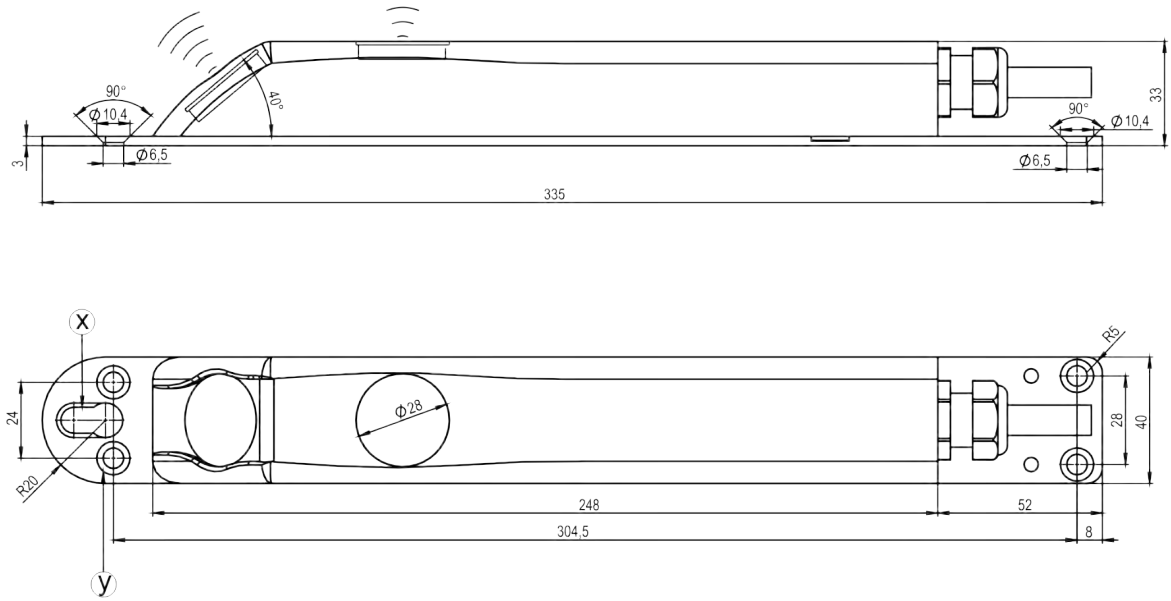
Dimensioned drawing Sensor OCL-L3
